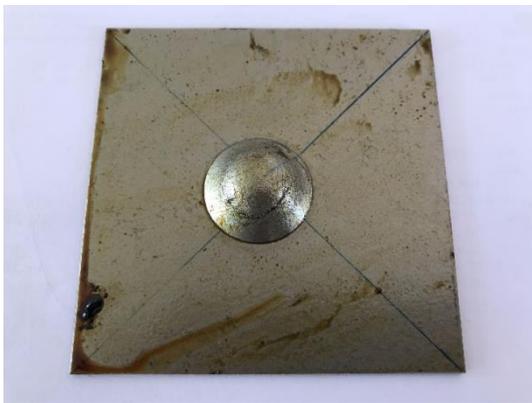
FRACTURE IN 1.5 mm THICKNESS SHEET- WET CONDITION
